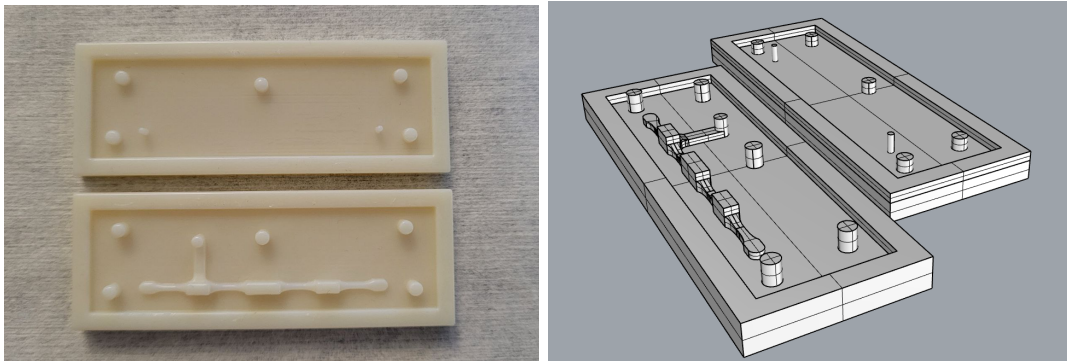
Mold for PDMS fluidics, with CAD perspective view on the right.
